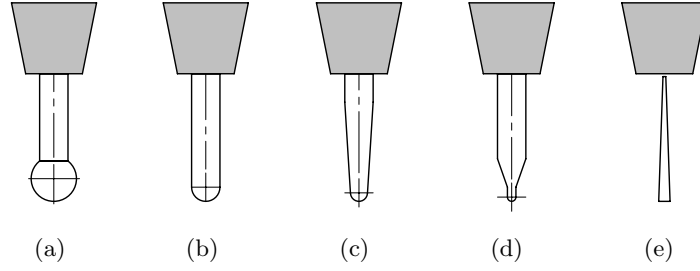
ISF forming tools: (a) dapper punch, (b) straight forming tool, (c) tapered forming tool, (d) tipped forming tool, (e) water jet.
